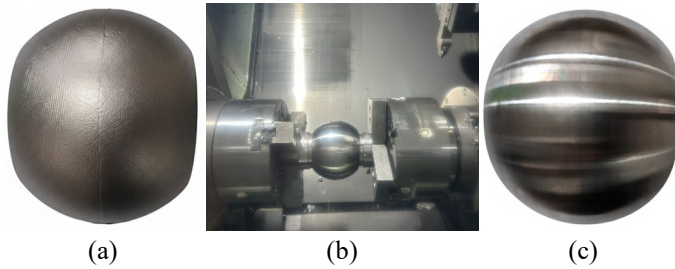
(a) Casting ball; (b) turning of the ball; (c) ball after finishing turning.
